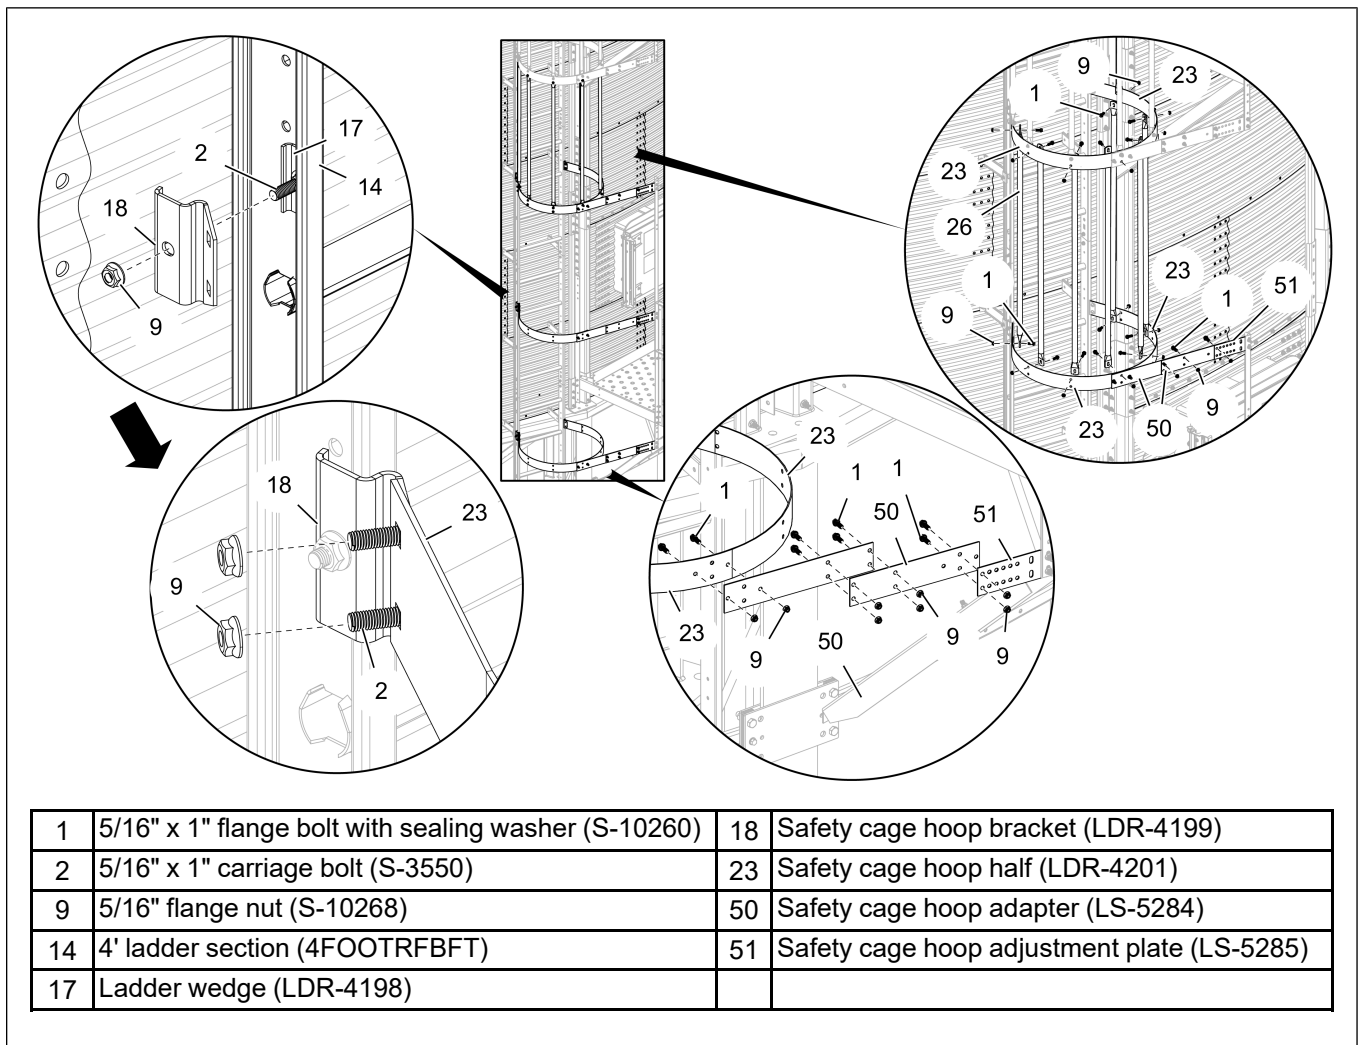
Installing the extension angle, adapter angle and adjustment plates
